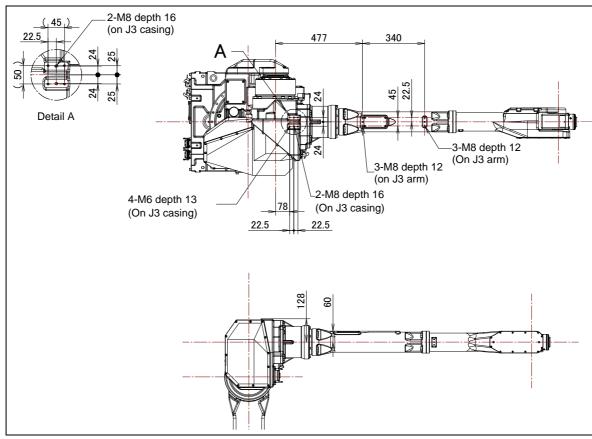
(c) Equipment mounting surfaces (M-710iC/20M)
